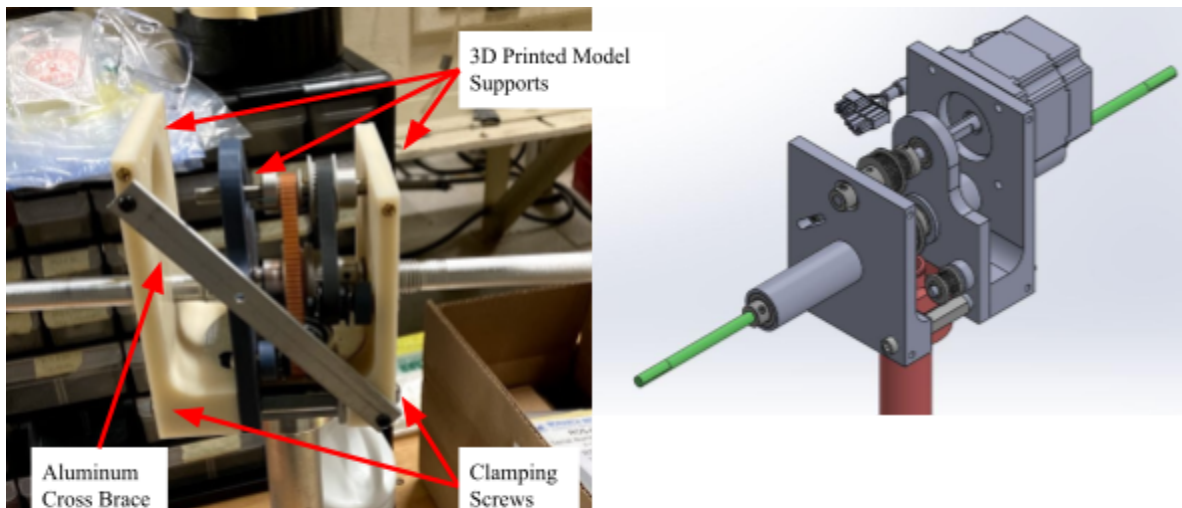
Annotated image of the major components of the chassis structure when test assembly produced (left) and CAD model of completed assembly sans aluminum cross bars (right) to the turbine tower.
